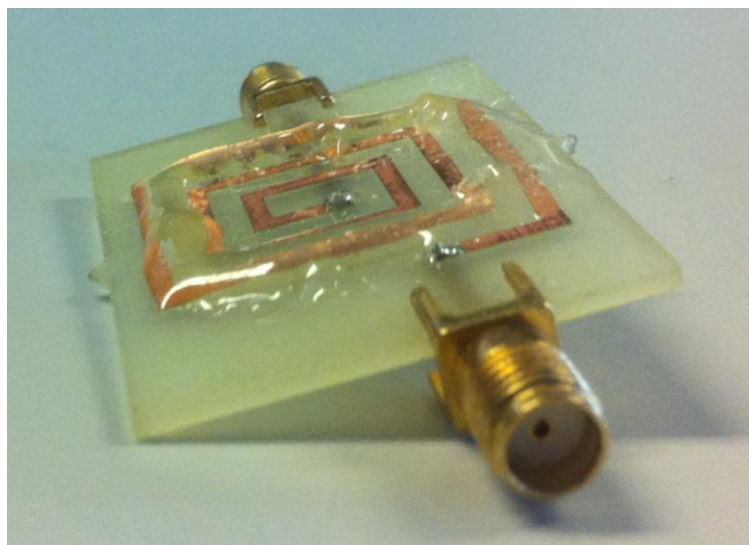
showing the fabricated inductor and the solder spheres created at each end of the coil
